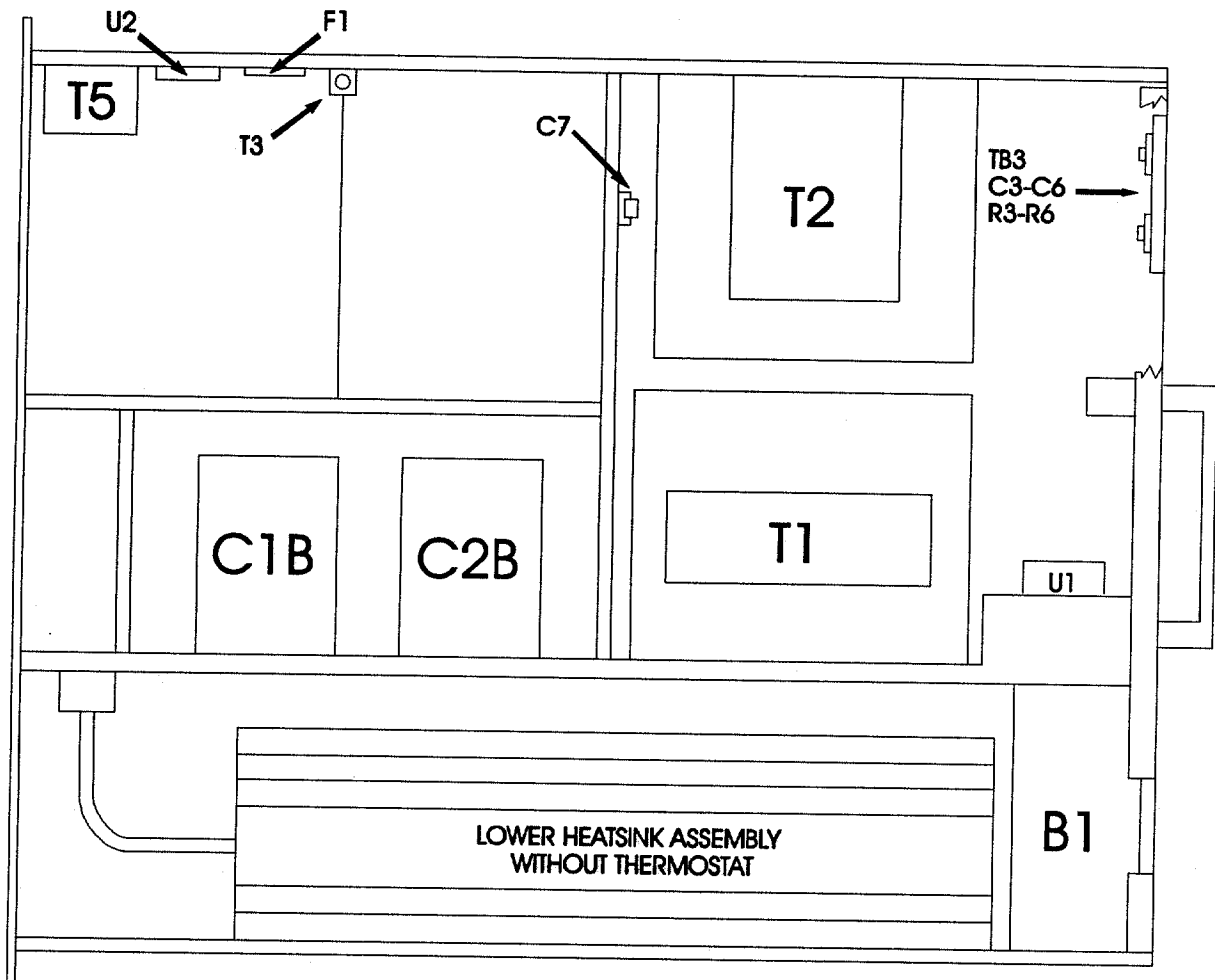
Model 1751SLE (Bottom View, Cover Removed)
